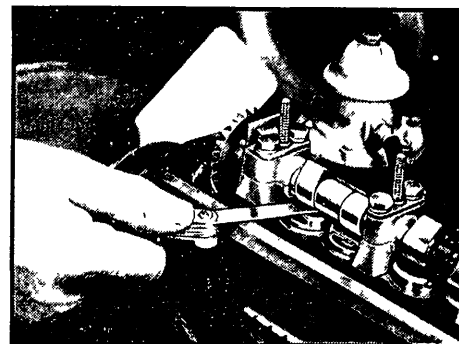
Checking valve clearance with feeler gauge. 1946-52
